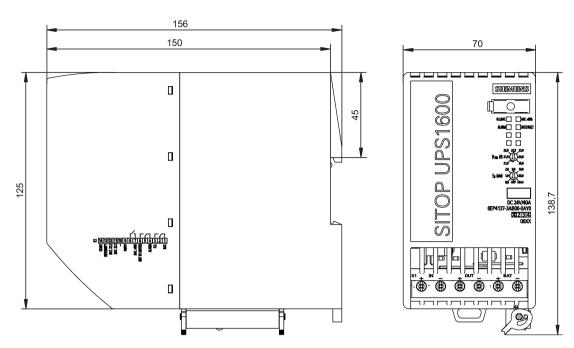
Dimension drawing 6EP4137-3AB00-0AY0, 6EP4137-3AB00-1AY0
